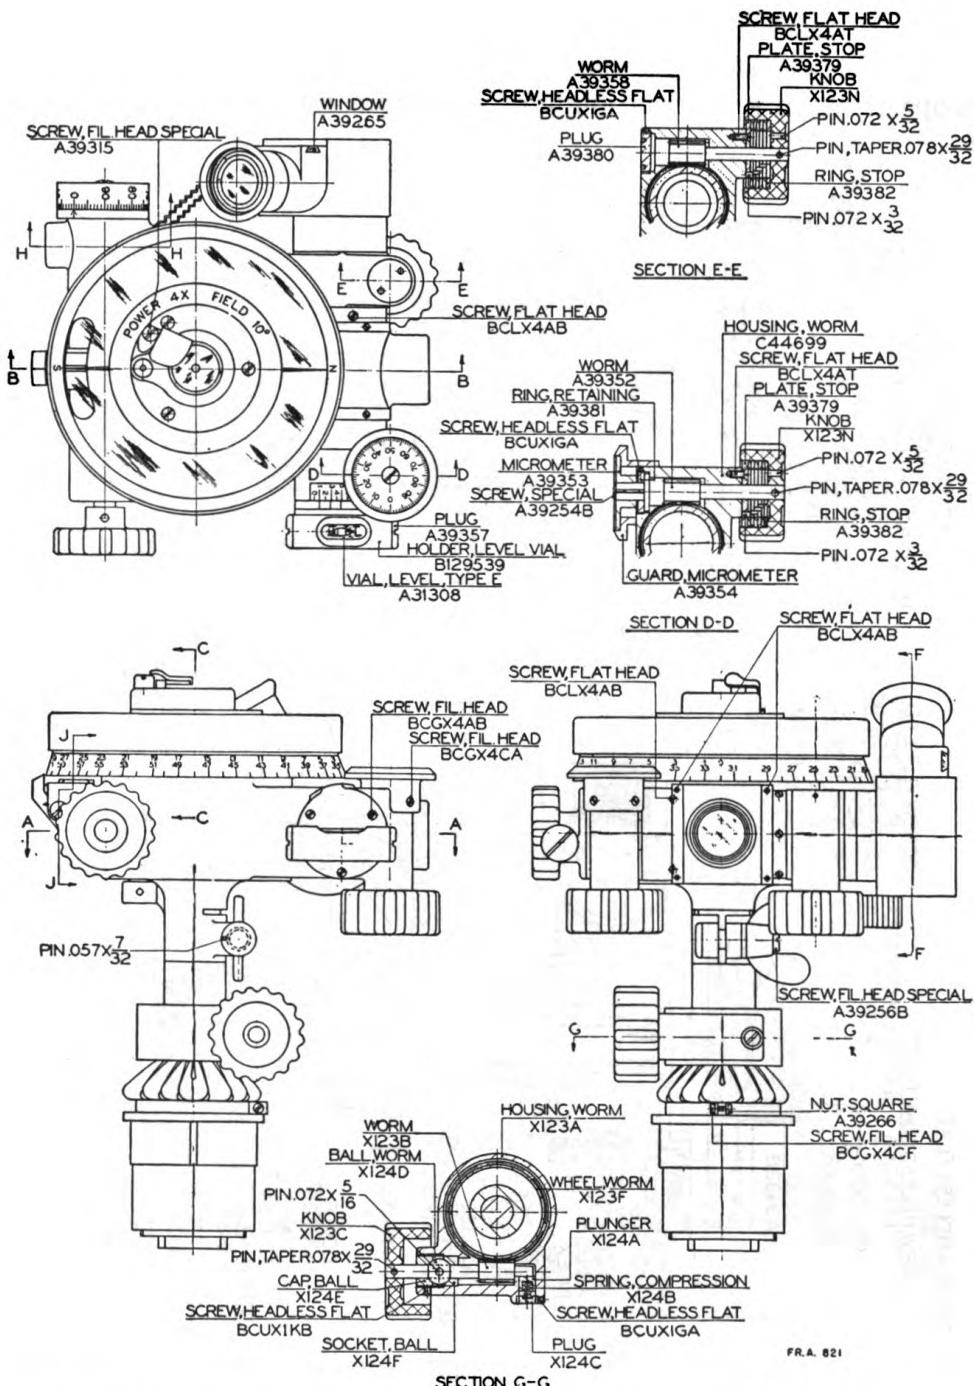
Aiming circle, M1916, and mount—assembled and sectioned views.
